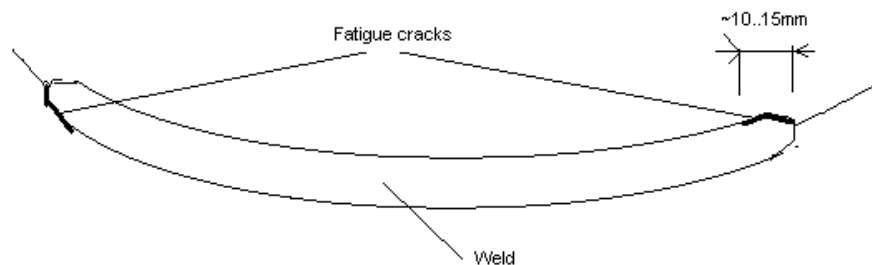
Schematic view of the weld with fatigue cracks
